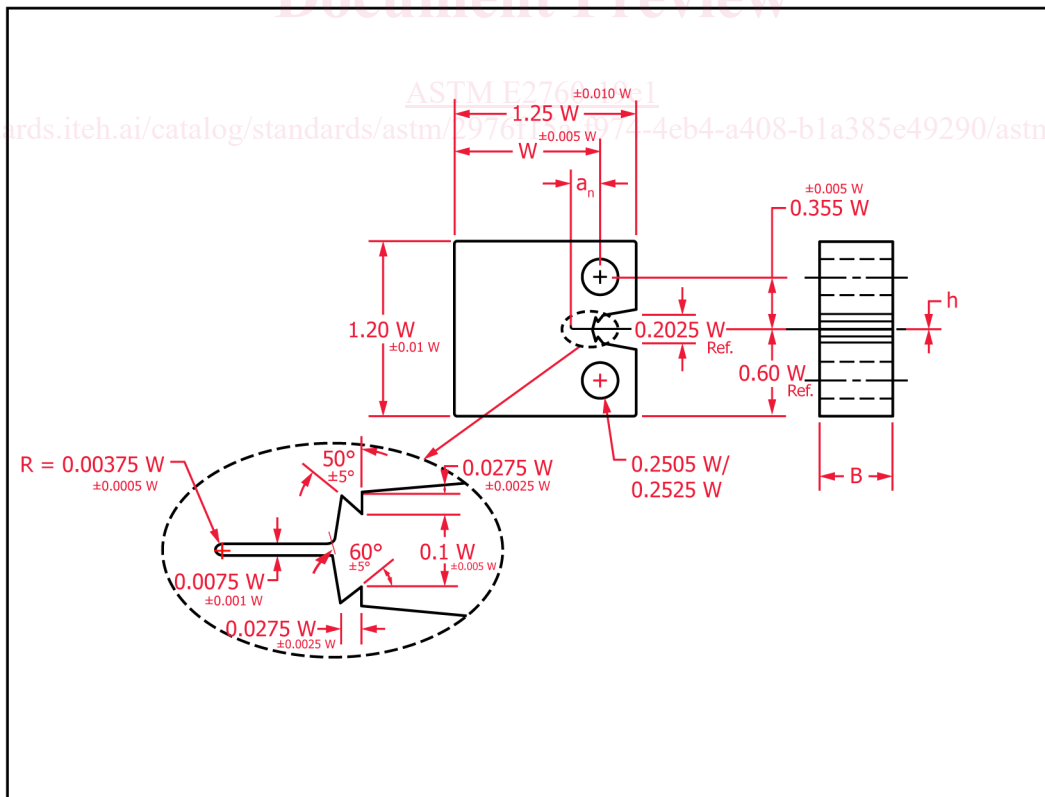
Drawing of a C(T) Specimen Recommended for Creep-Fatigue Crack Growth Testing and the Details of the Machined Notch and the Knife-Edges for Securely Attaching the Extensometer
